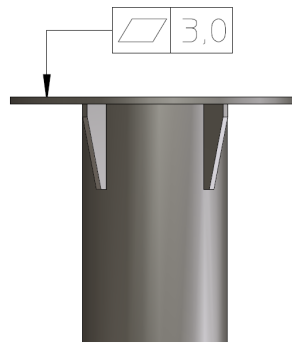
ADU mast flange, recommended flatness on the mast mount plateau.
